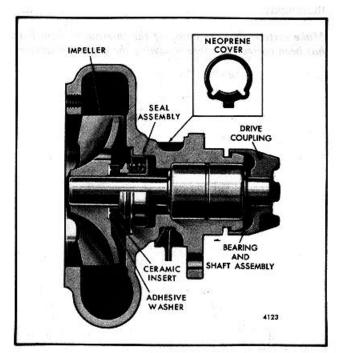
Water Pump With Ceramic Insert in Impeller
